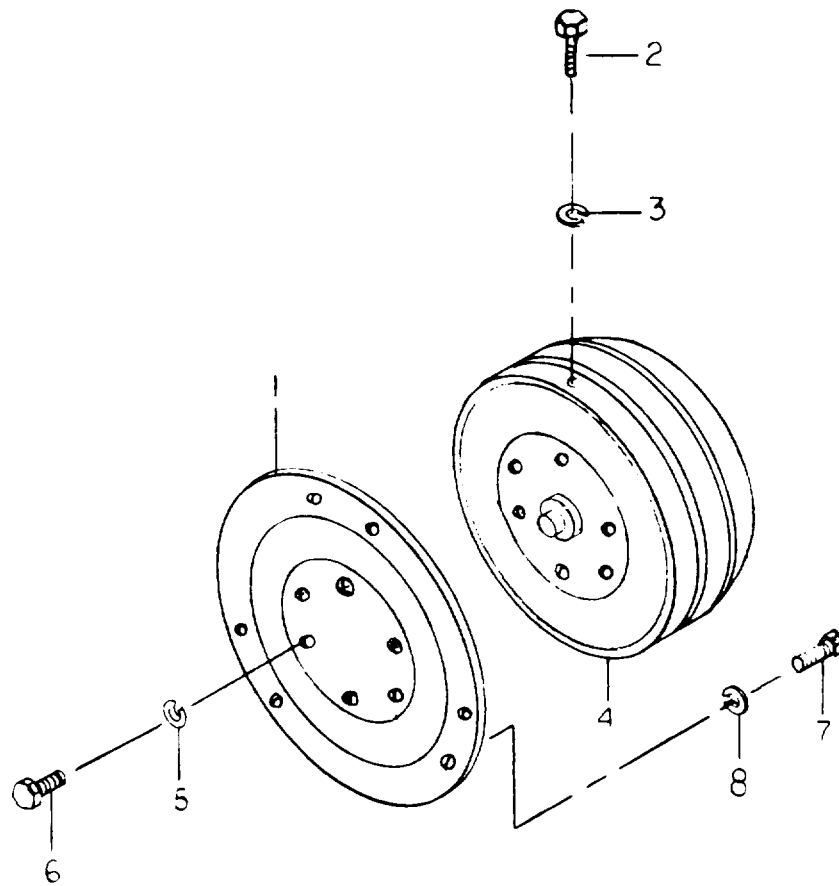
TORQUE CONVERTER SUB ASSEMBLY
